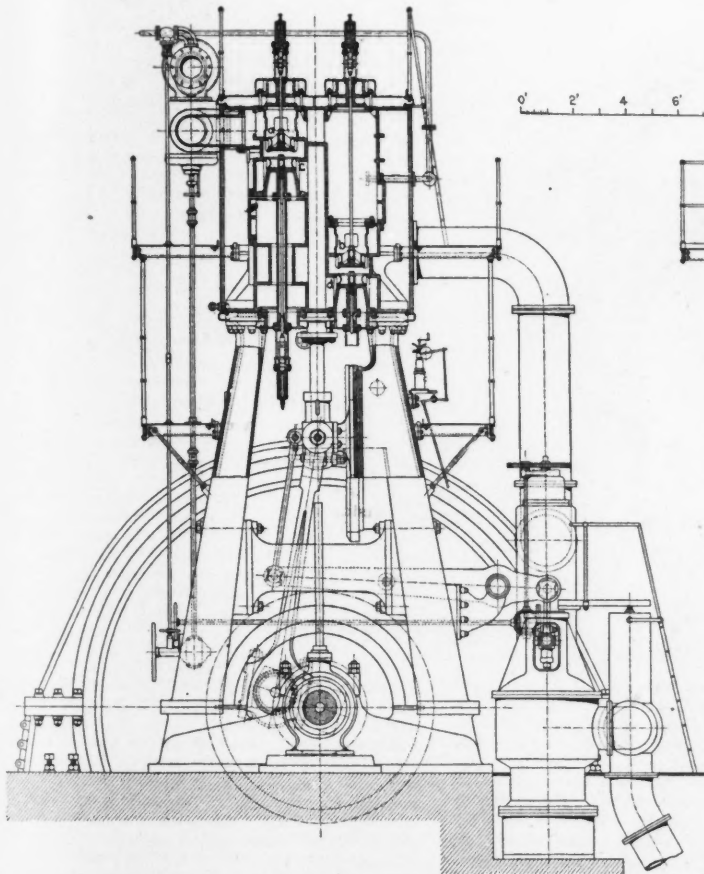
SECTIONAL END ELEVATION SHOWING DETAILS OF HIGH PRESSURE VALVES, CROSSHEAD AND AIR PUMPS.
